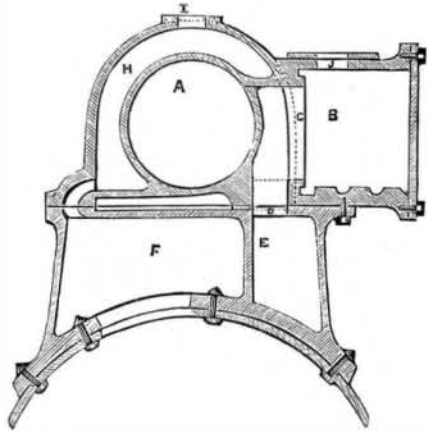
Cross Section of Cylinder, Dome, and Exhaust Chamber.
